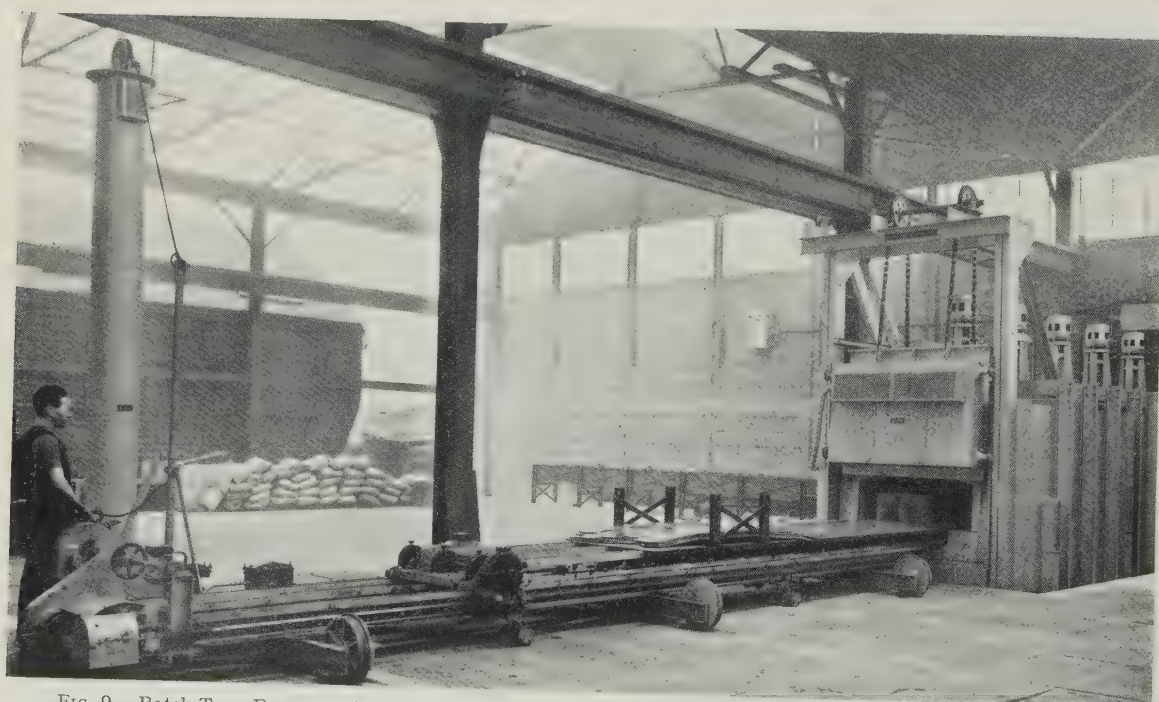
Batch-Type Furnace, with Charging Machine, for Annealing Copper and Copper Alloy Sheets, Tubes, &c.
